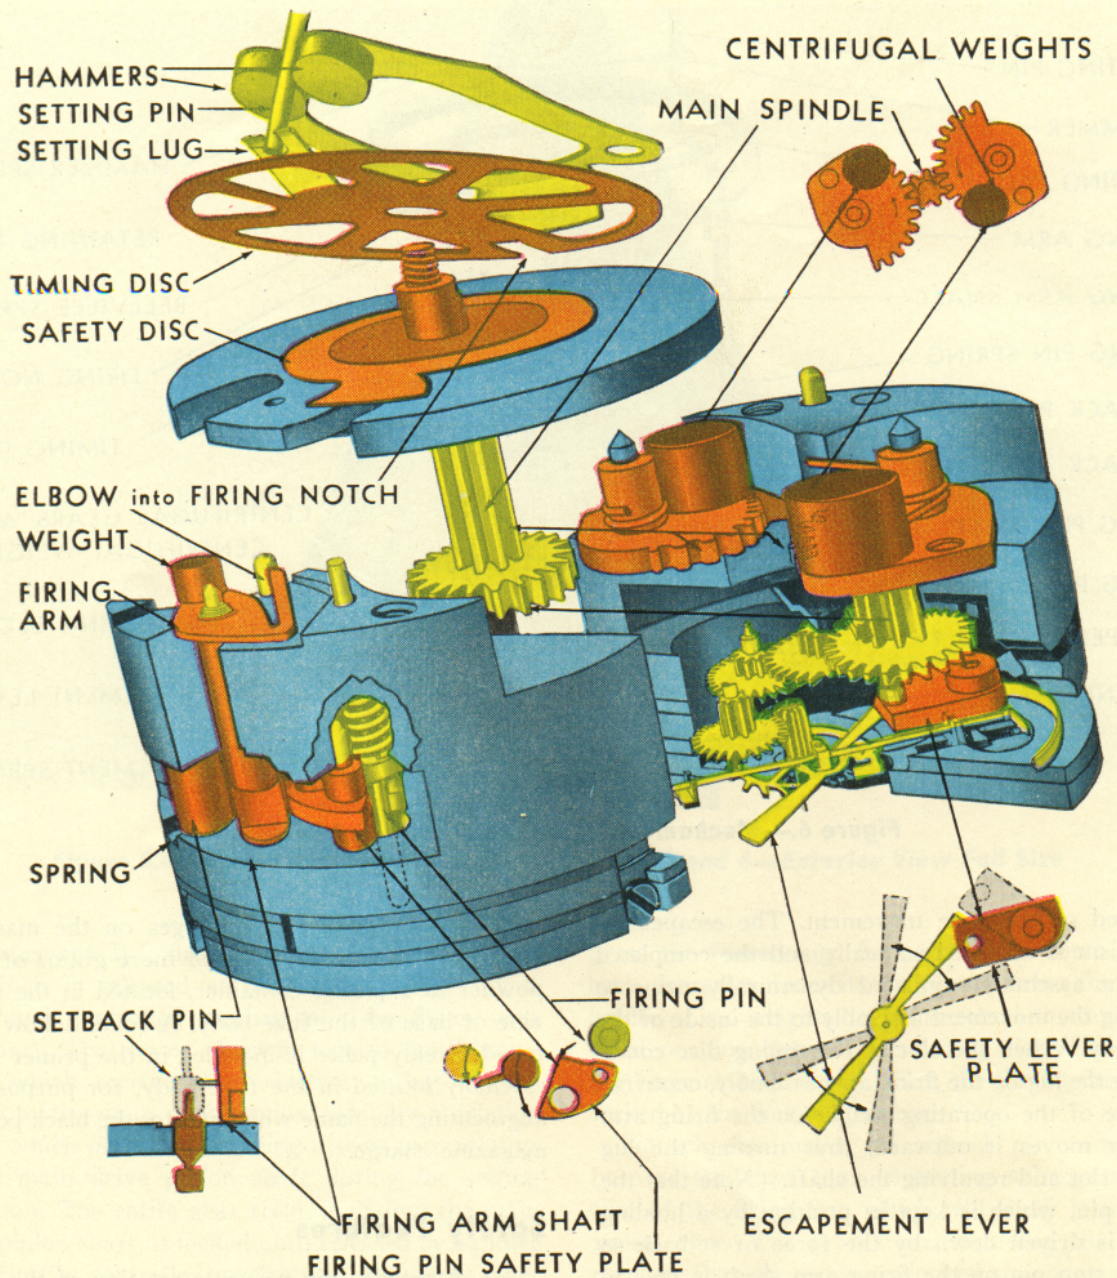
Mechanical Time Fuze Mk 18—Exploded View
